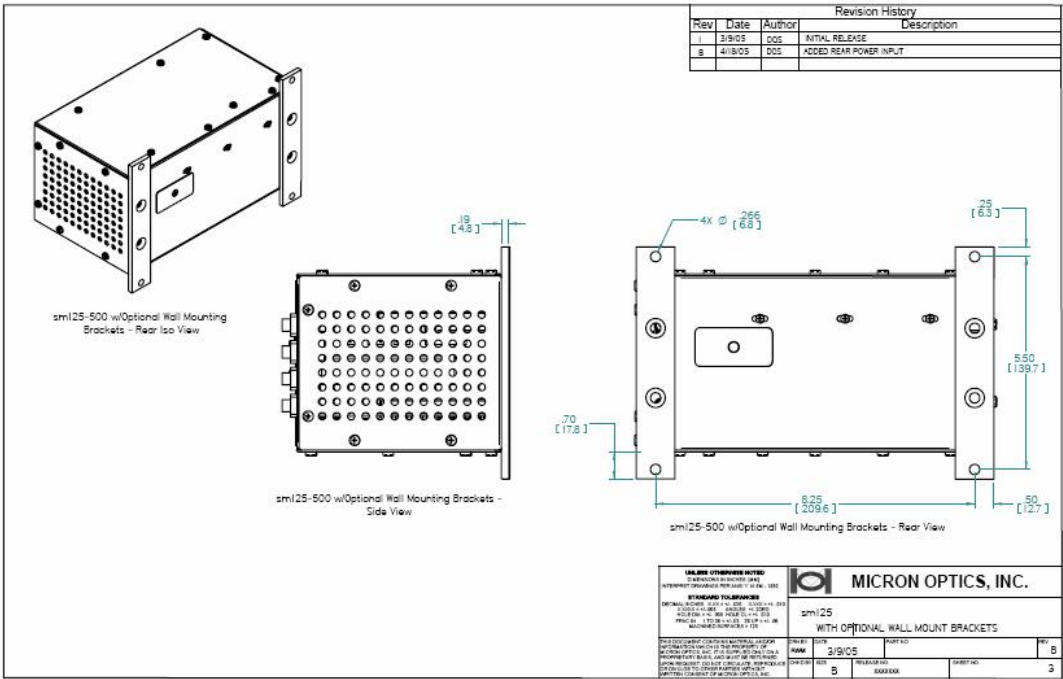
Mounting Option 1: Flat Mounting Bracket
